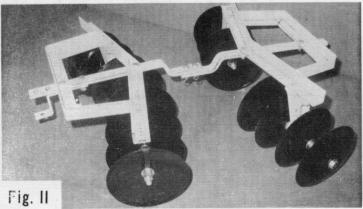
Fig. II shows Assembly of front and tandem Gangs for mounting to Tractors with tubular Sleeve Type Hitch only. Do not attempt to lift front and tandem Gangs with Tractor Lift.
